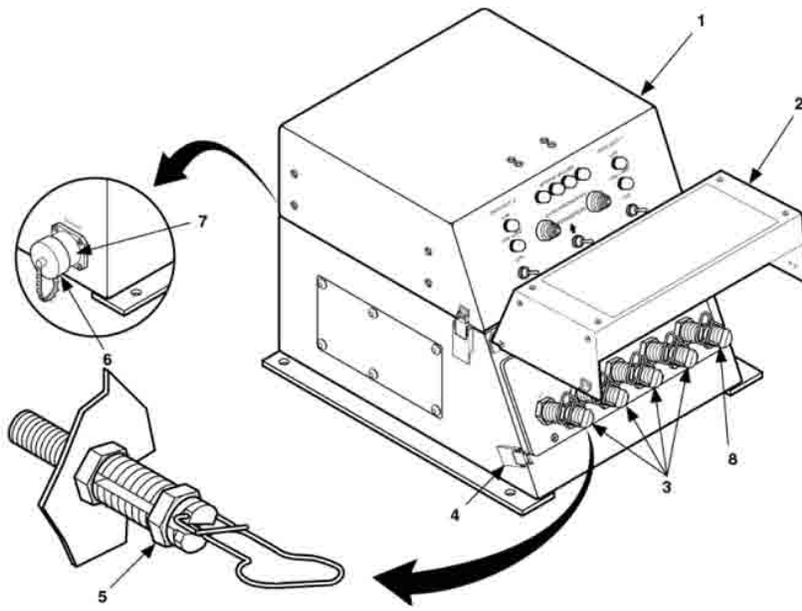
Switch Box Load Cable Connections (Old Configuration).
